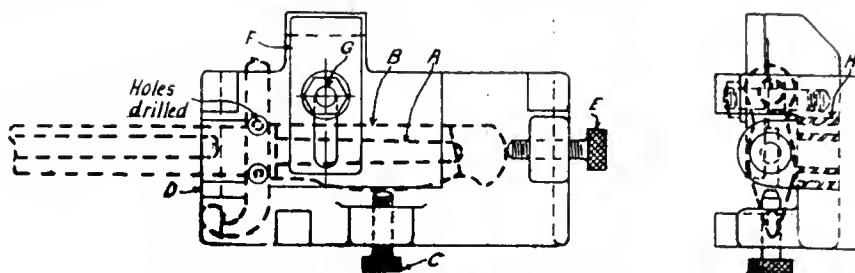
DRILL JIG FOR ASSEMBLING GUARD TO HILT
